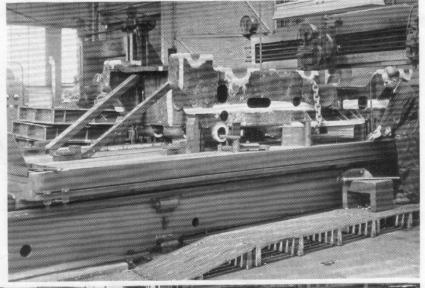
General view of the set-up seen in Fig. 32. The boring bar carrying the tool is held in a chuck bolted to the planer cross-slide. The work, work support brackets and boring bar steady all move with the planer table as it reciprocates.
